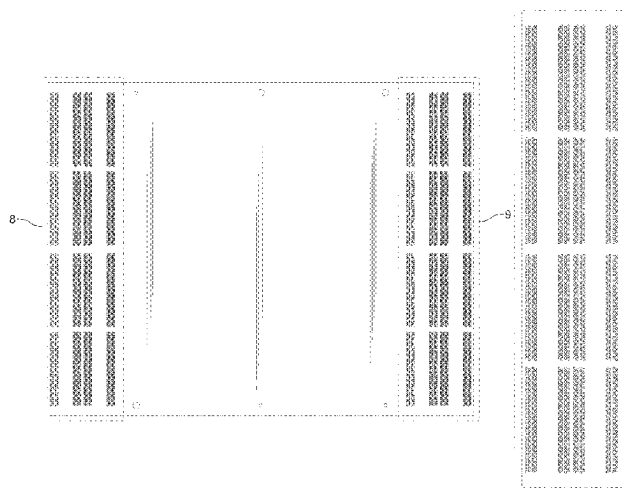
is a rear elevation view of a contact field for a printed circuit board;
